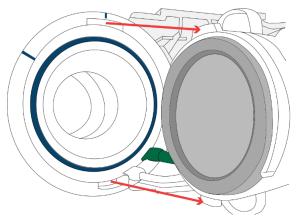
Alignment of Flowhead Subject End and Heater Assembly
